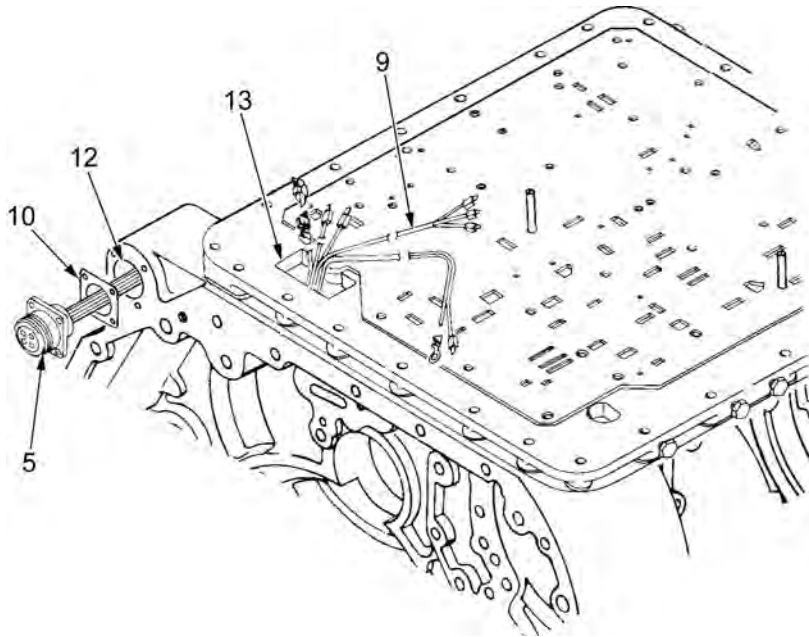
Wiring Harness Installation Through Oil Transfer Plate.
